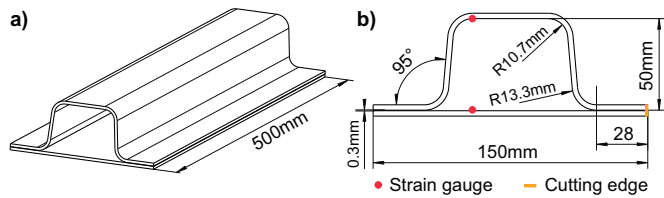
Schematic view (a) and cross sectional view (b) of the hat profile component with the location of strain gauges and the cutting edge.
